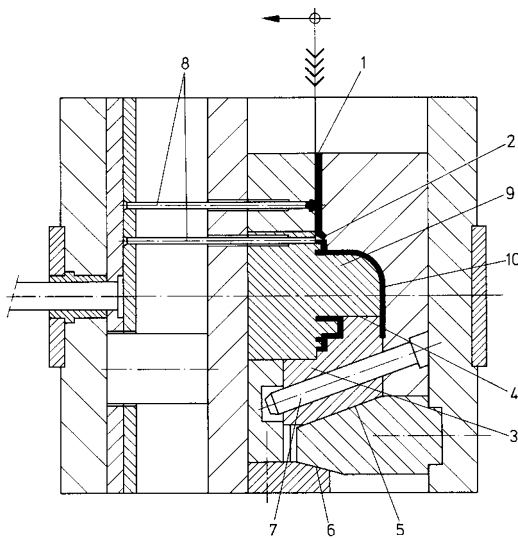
Cable socket injection mold with mechanical core pulling (slide)
